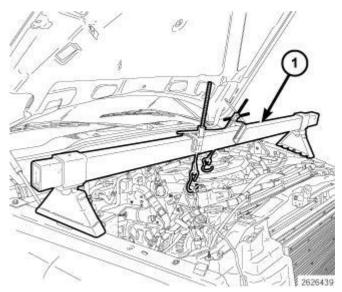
Engine Support Fixture Tool 8534B Courtesy of CHRYSLER GROUP, LLC
